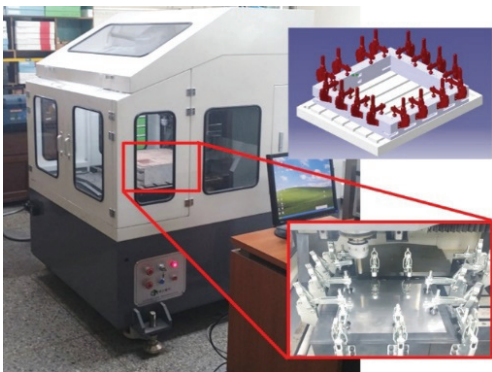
CNC machine for incremental sheet forming and clamping device of sheet
